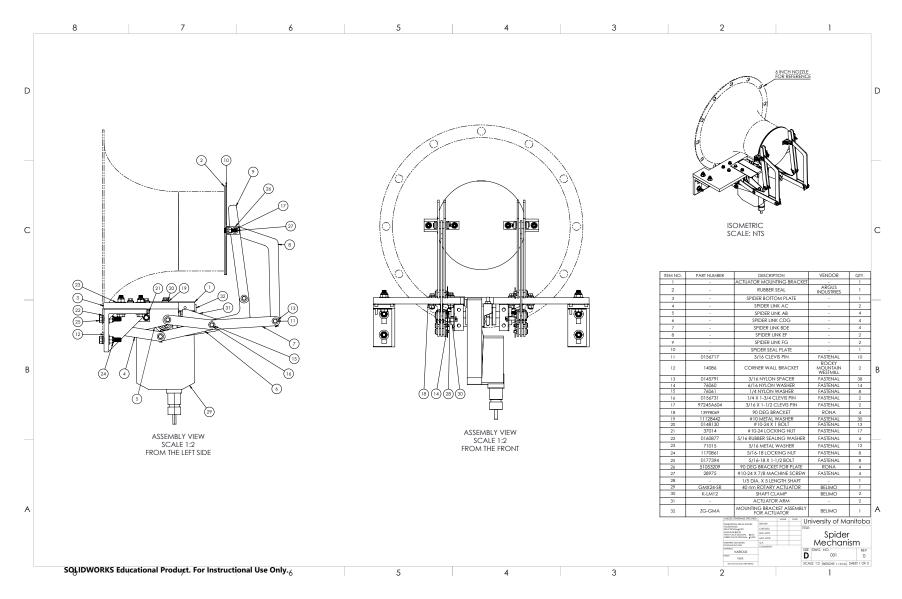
Spider mechanism detailed drawing sheet 1 [1].
